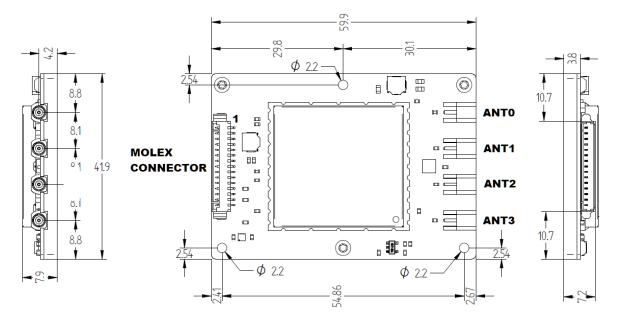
R7104C Lepton⁷x4 mechanical drawings and connectors location (units: mm)
